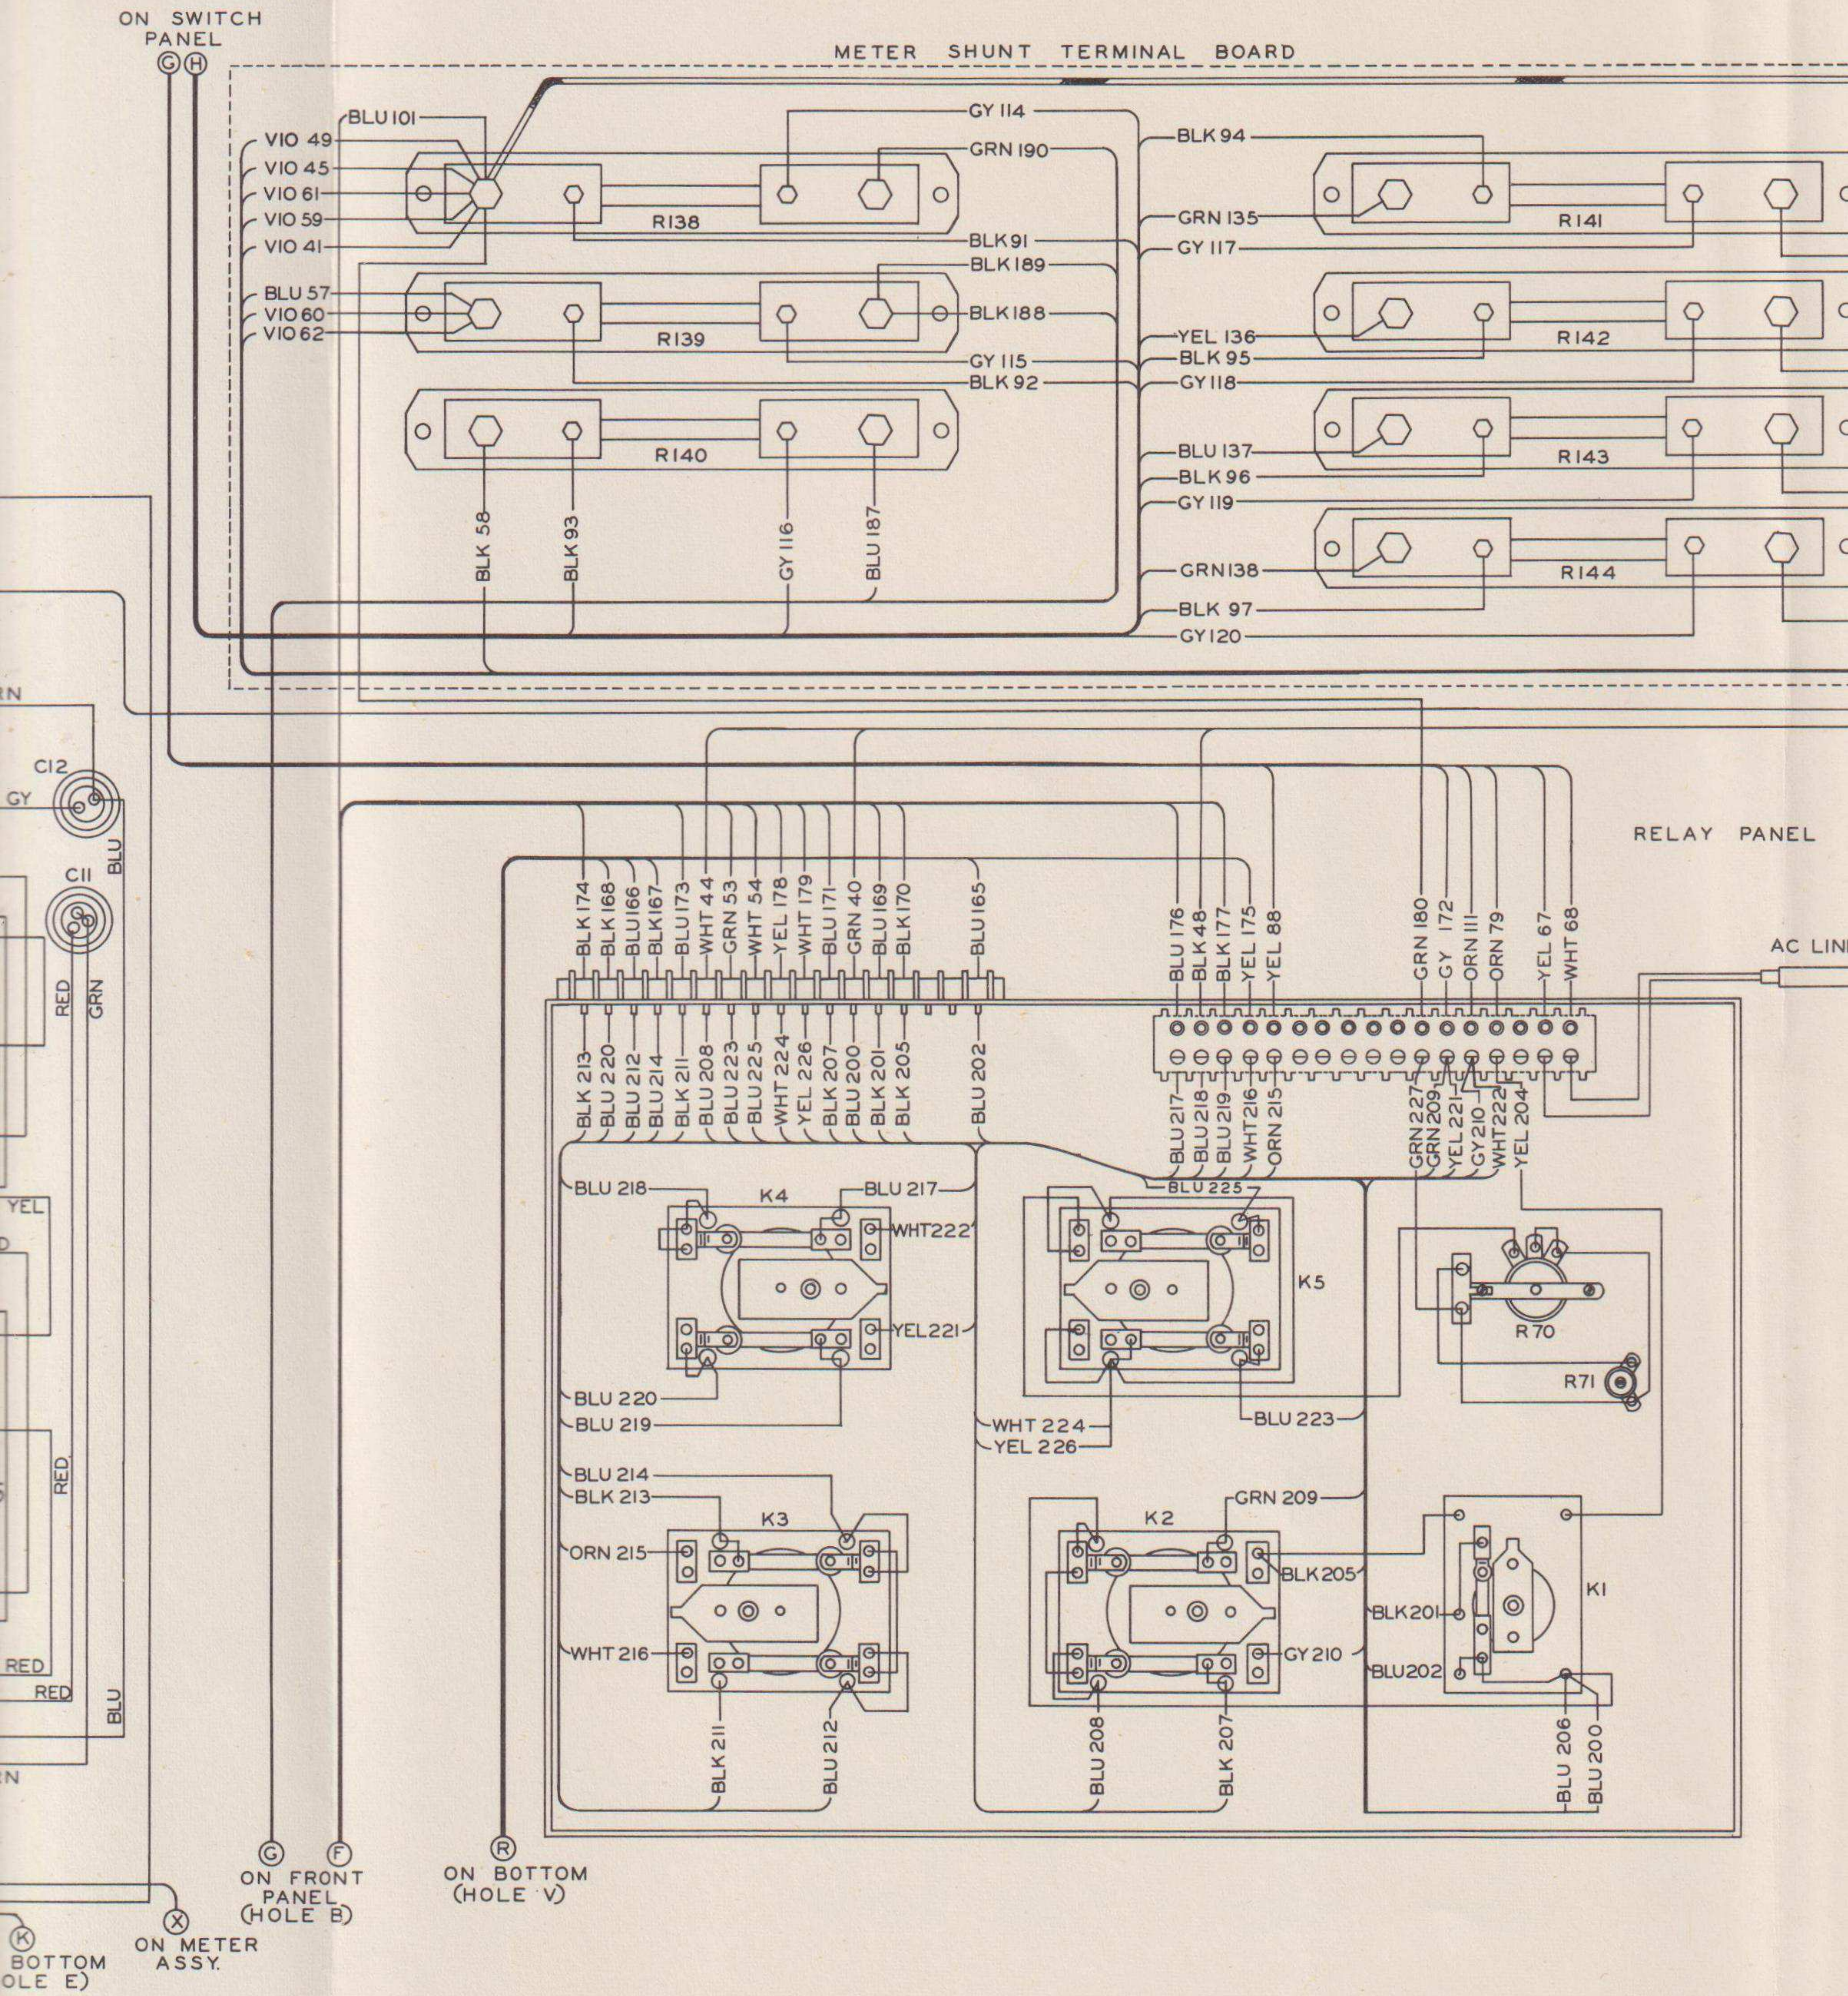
Amplifier chassis, power supply chassis, relay panel, and meter shunt terminal board of test set, wiring diagram.
